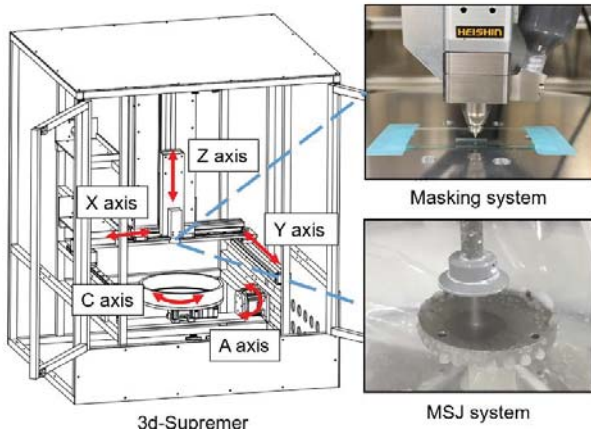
3-dimensional Surface Processing through Elimination by Mechanical Removing
